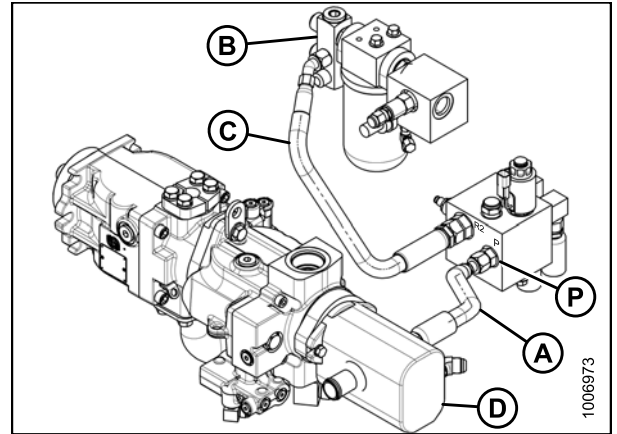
M150/M200 Configuration After Installing the DWA Drive Manifold
